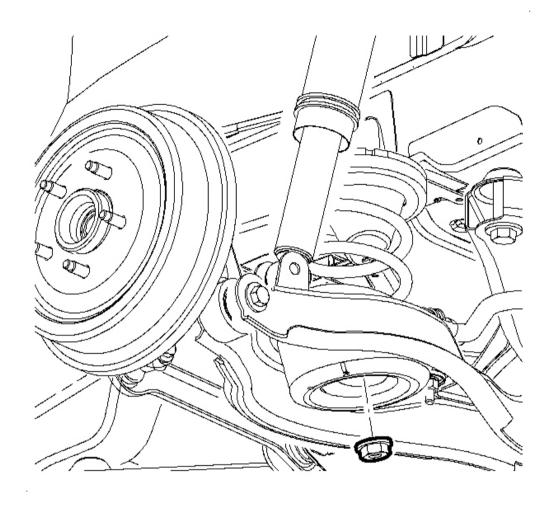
Jounce Bumper Nut & Lower Control Arm Courtesy of GENERAL MOTORS CORP.
